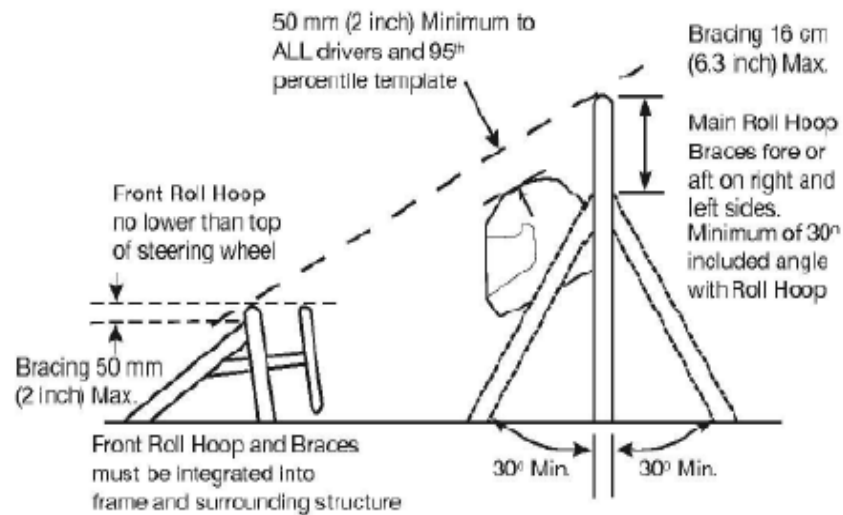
Illustration of the clearance required above the drivers head [1]
